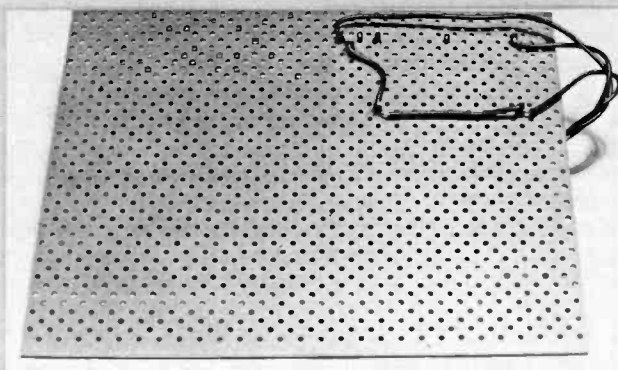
A simple circuit assembled on pins that can be inserted anywhere on the perforated board. The board and pins are available from Radio Shack. (Board #276-1392; pins #270-1394)
